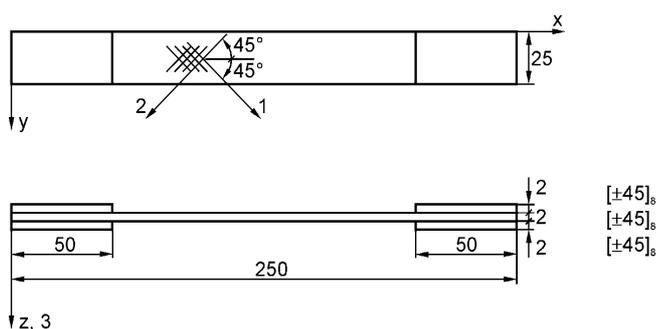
A shape and geometry of the specimen, according to Ref. [2]
